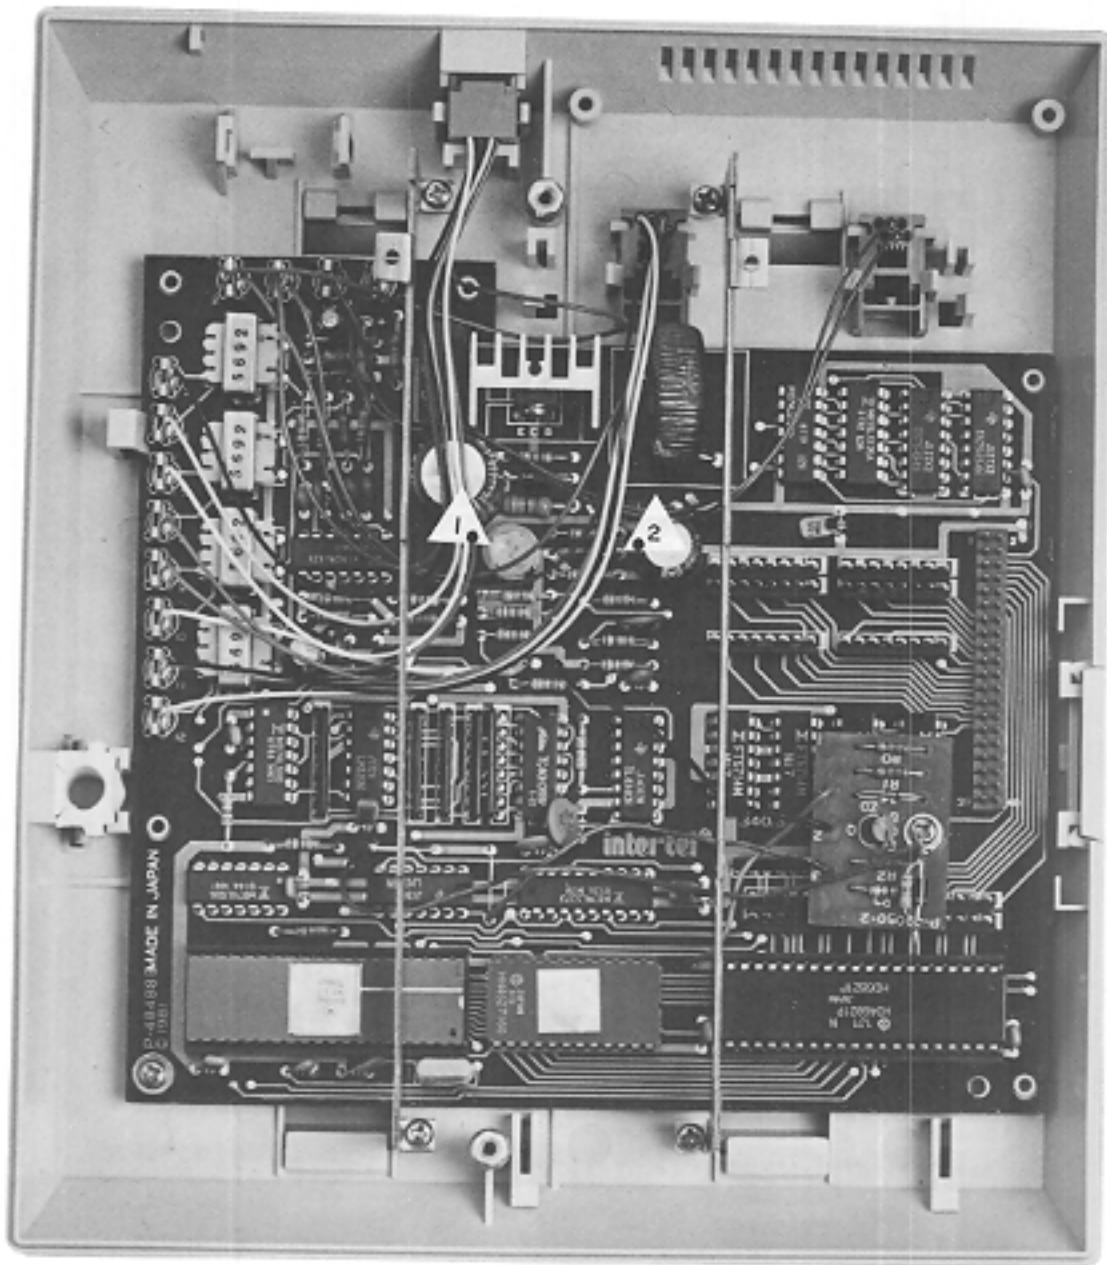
6460D/3030D DSS/BLF Control PCB
